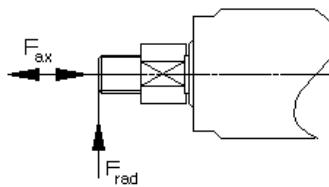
Load on output shaft for basic motor with threaded shaft.
